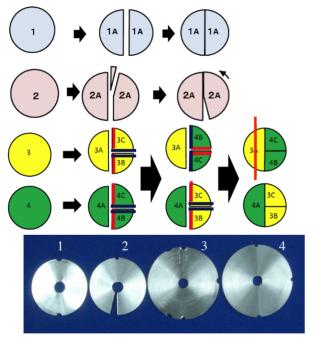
EBW combination of the sample pieces (upper) and machined and BCP'ed coin samples (bottom).
